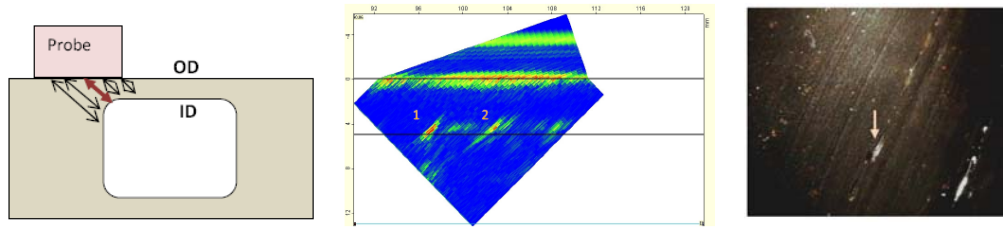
S scan probe configuration (left), S scan image showing defect during angle beam examination (center), machining marks on the channel inner surface which probably caused the indication (right).
